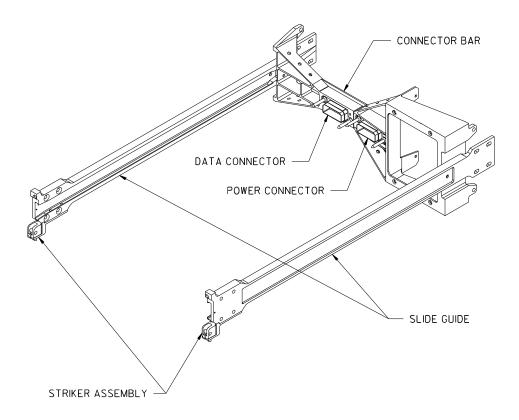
HRF Slide Guide Assembly
